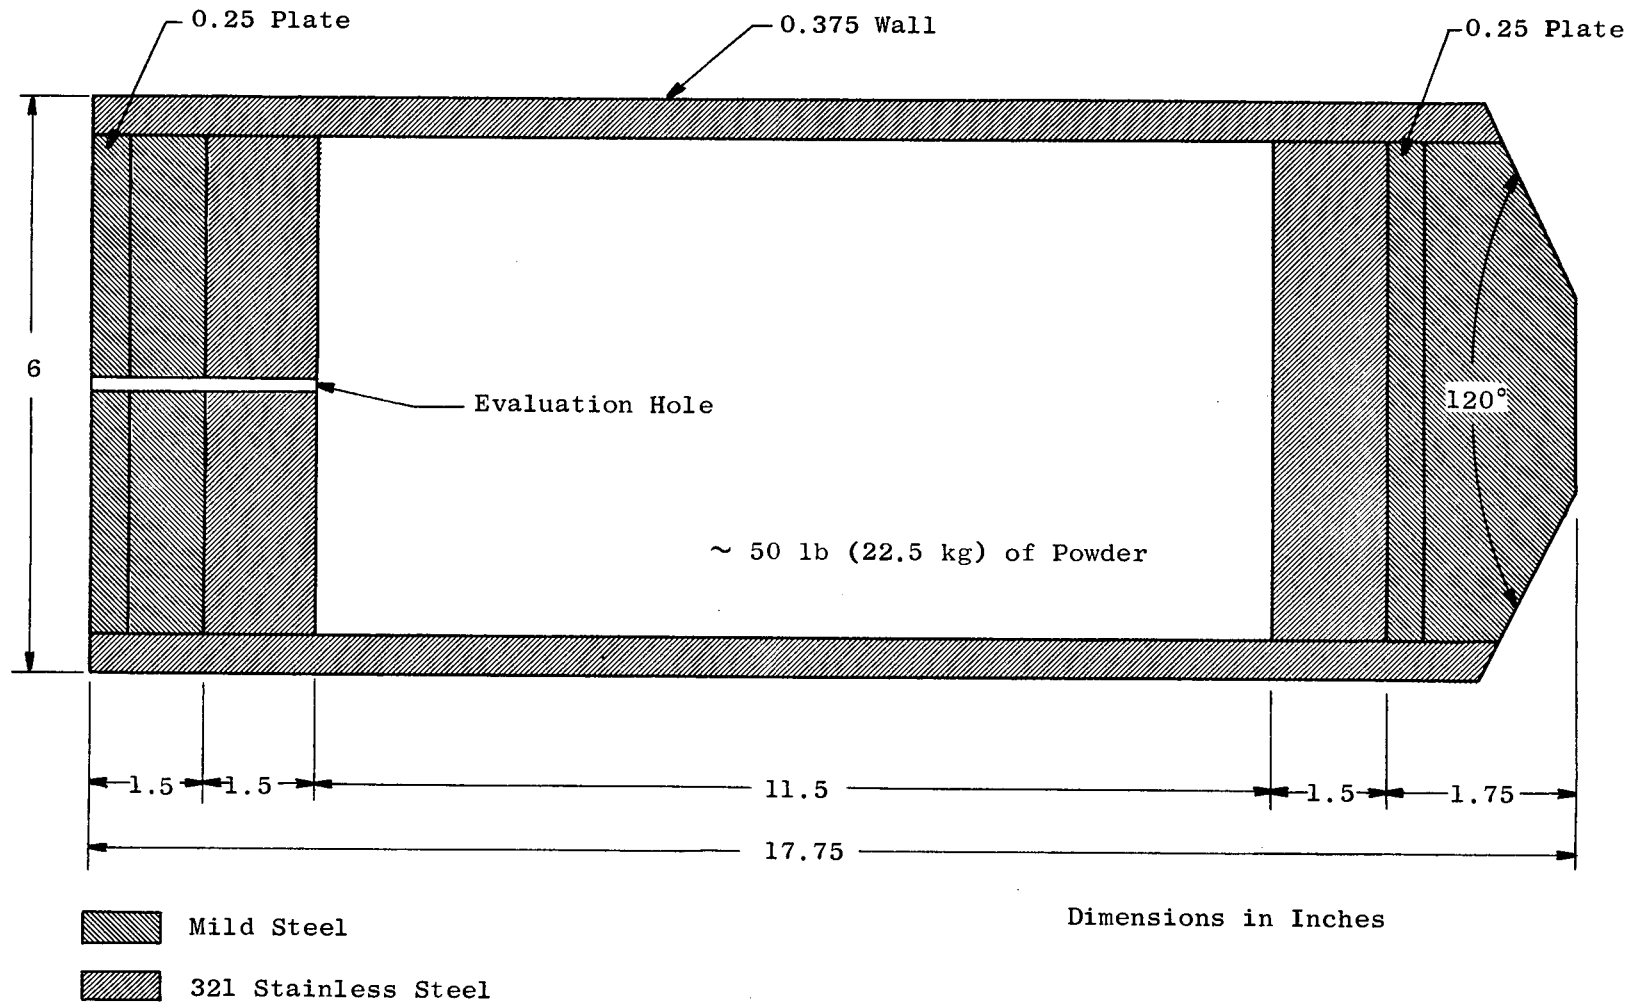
Schematic Drawing of Extrusion Can Used for Second Extrusion Series.
